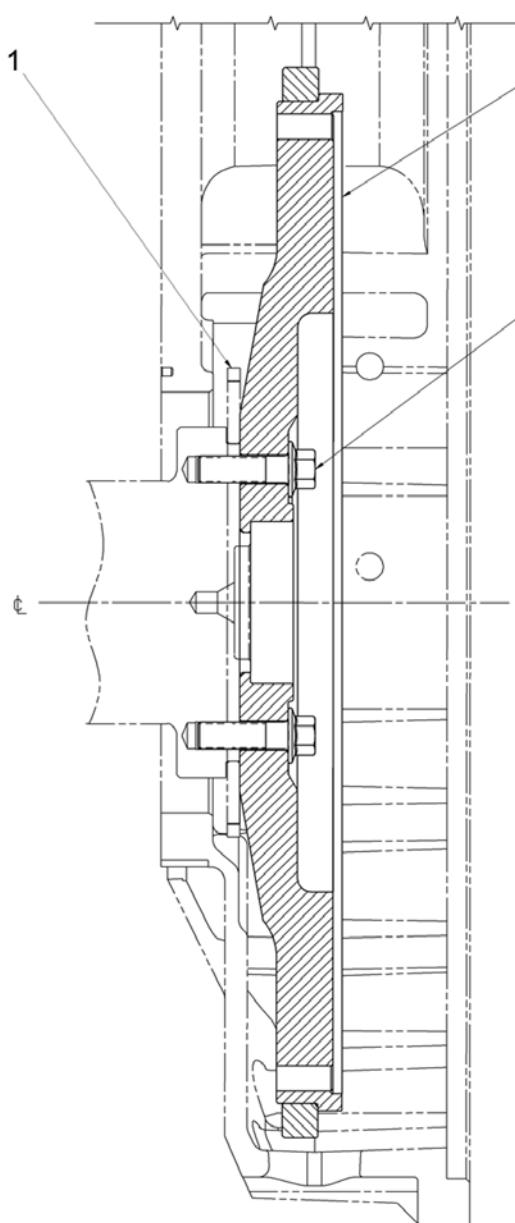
15.5 inch flywheel - for multiple plate clutch applications (800 lbf·ft and above)
